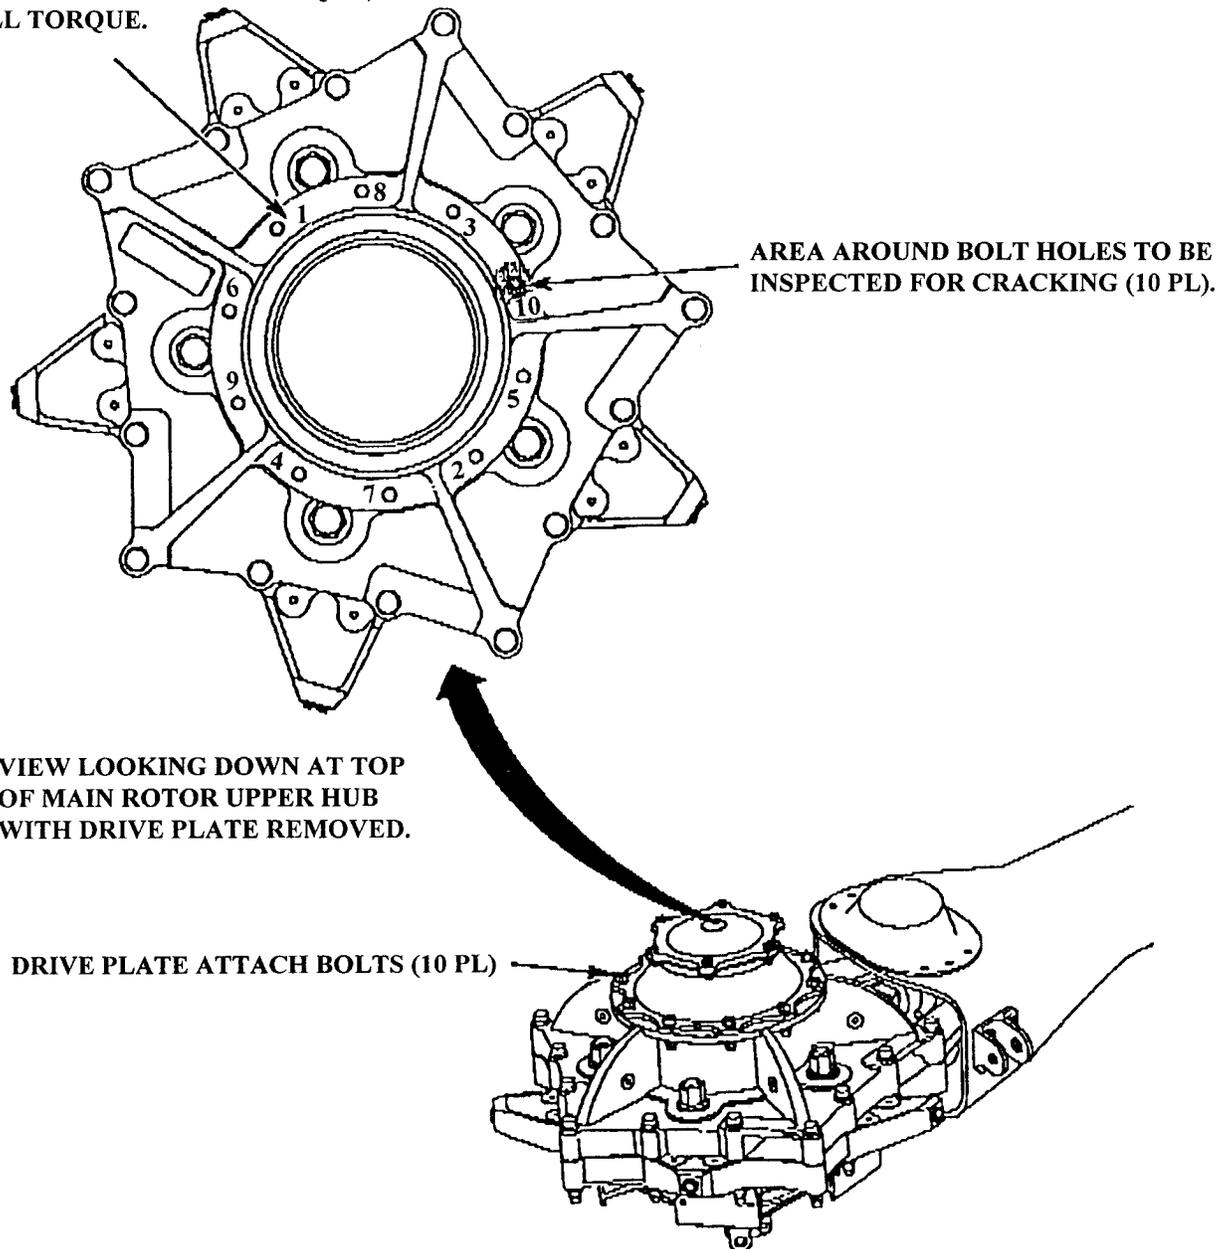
Main Rotor Upper Hub Assembly Inspection.
